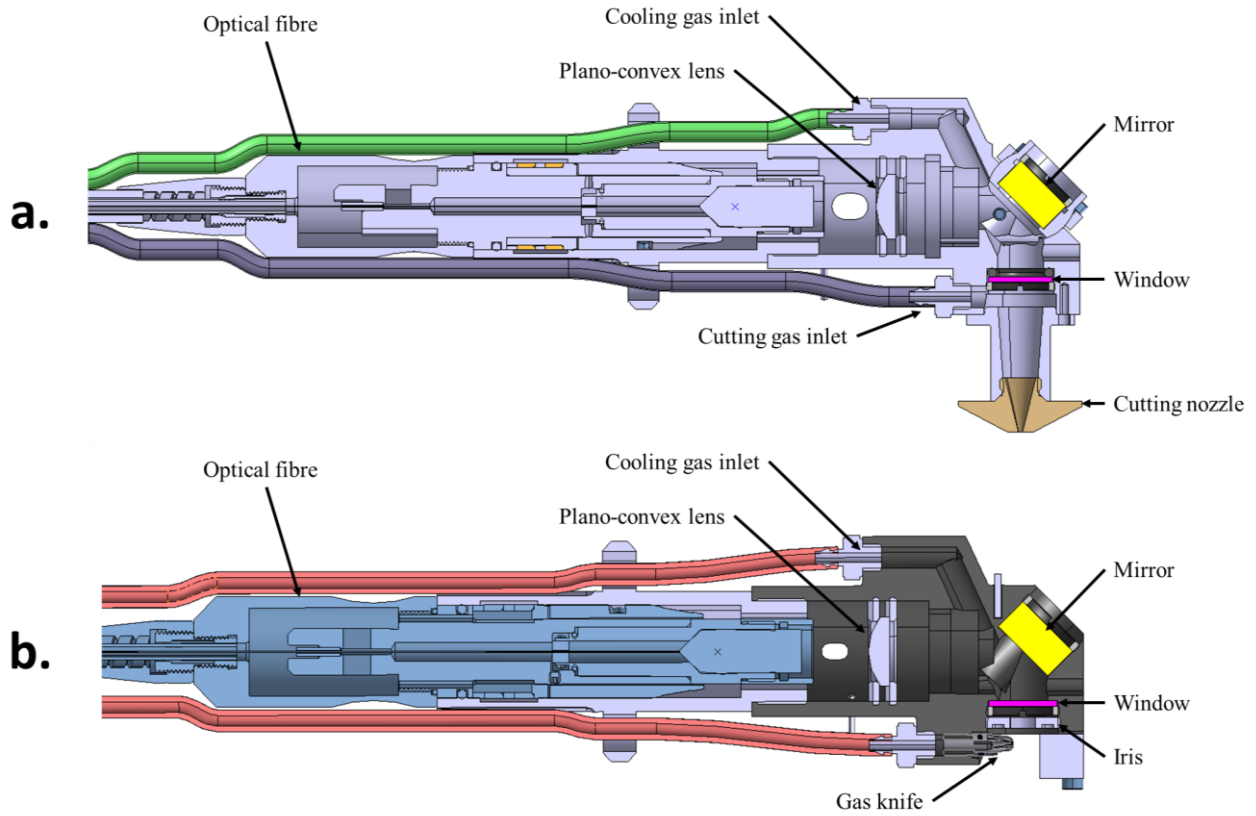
Cut-aways showing the designs of the laser cutting (a.) and welding (b.) heads.
